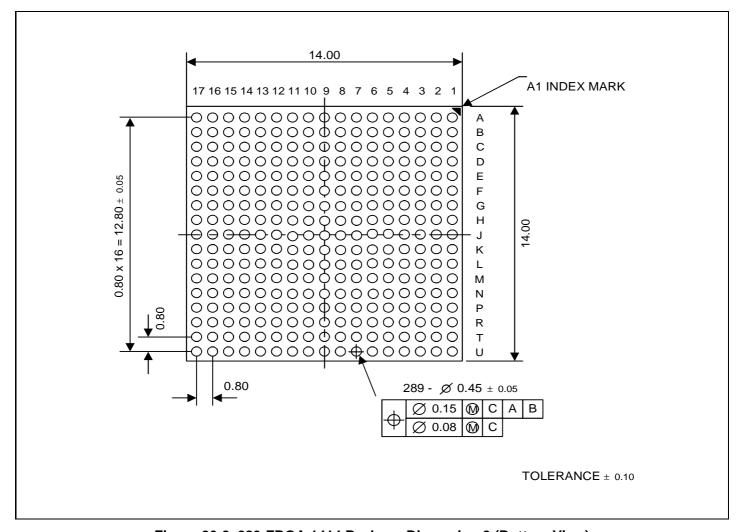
289-FBGA-1414 Package Dimension 2 (Bottom View)
